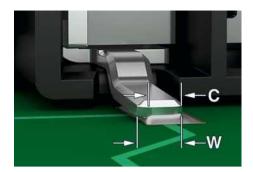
Flat gullwing connection, minimum width at the end of the soldering spot (C)
